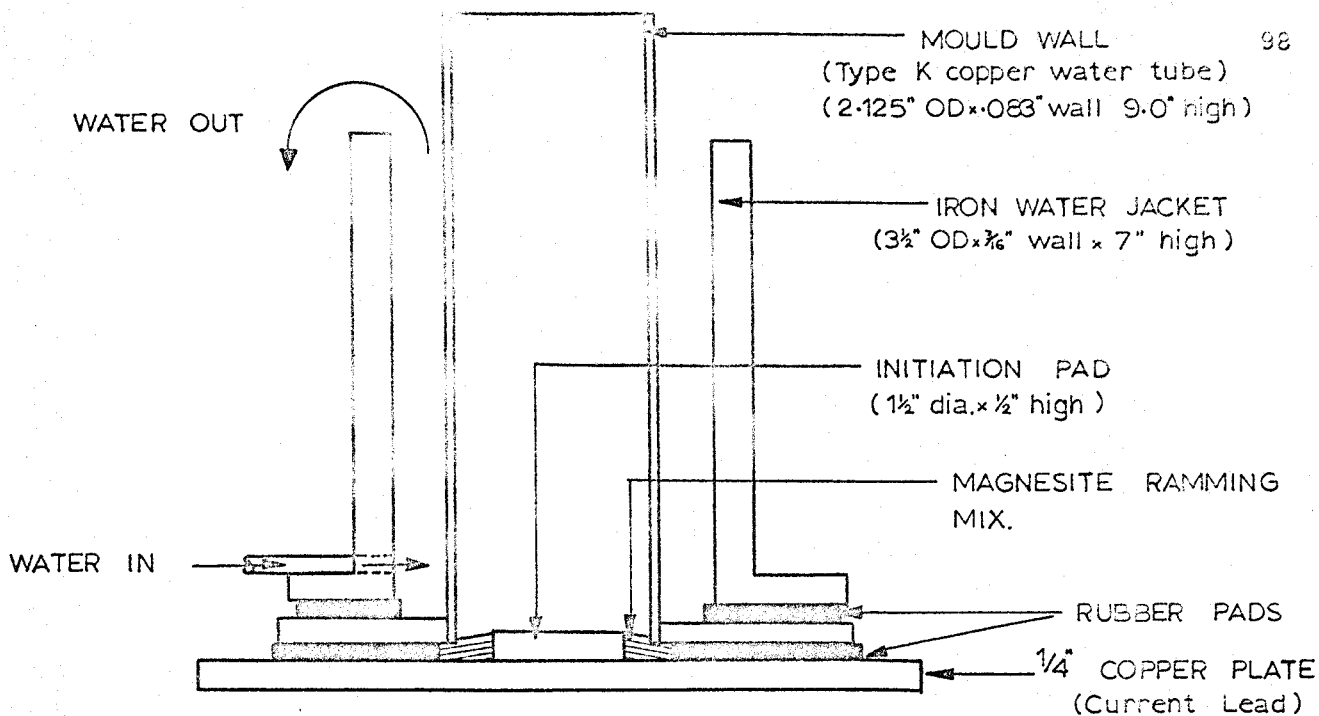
A longitudinal section through the electrically isolated mould wall system.
